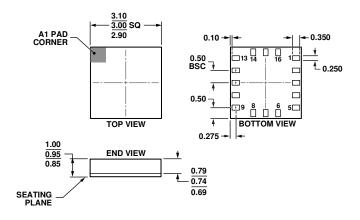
16-Terminal Land Grid Array [LGA] (CC-16-3) Solder Terminations Finish Is Au over Ni Dimensions shown in millimeters
